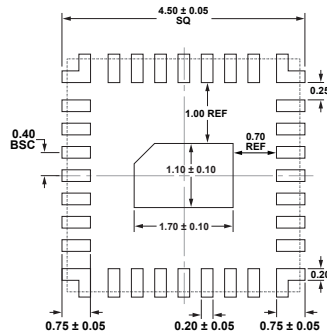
28-Lead Lead Frame Chip Scale Package [LFCSP]
